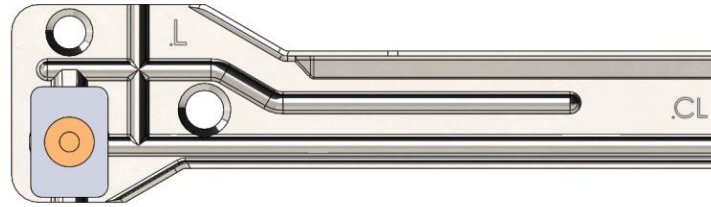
Modified cabinet slides with blocks instead of wheels.
